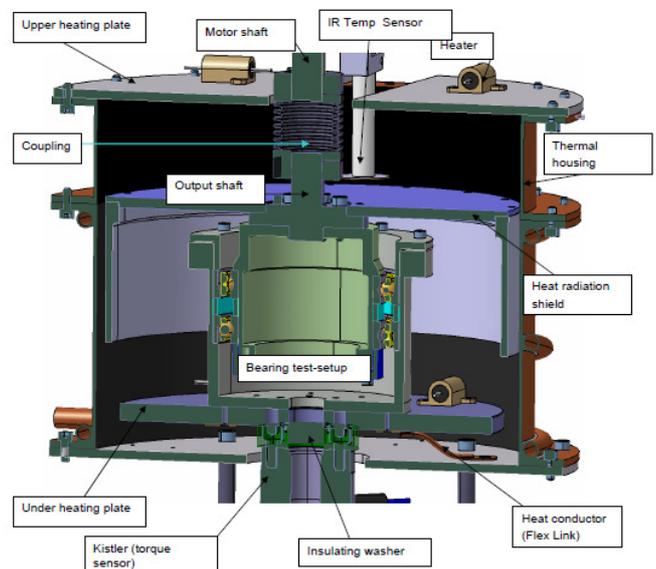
Flight Representative Bearing test stand and bearing configuration as used in the TV Test
